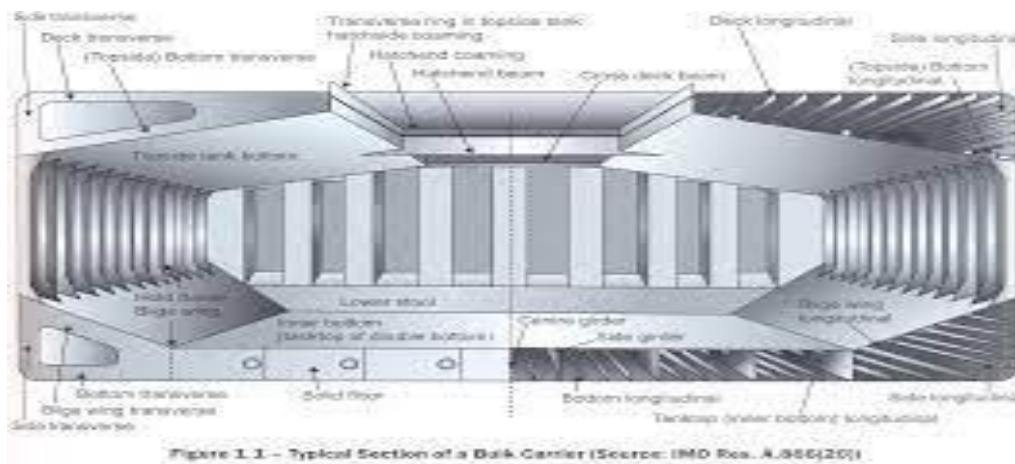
Typical Section of a Bulk Carrier (Source: IMO Res. A.955(20))
